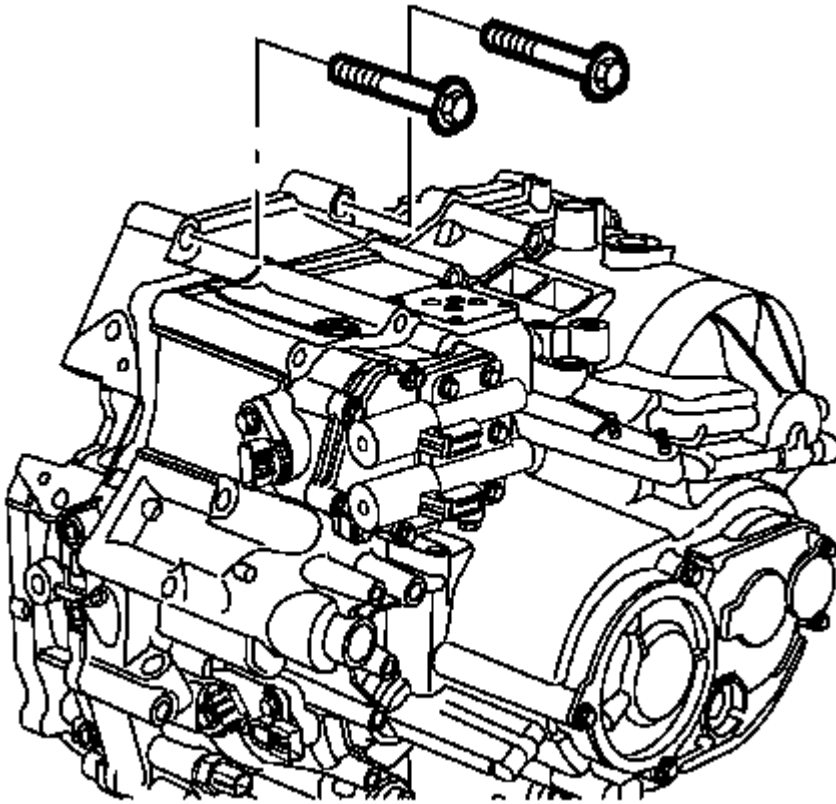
View Of Transmission-To-Engine Mounting Bolts
